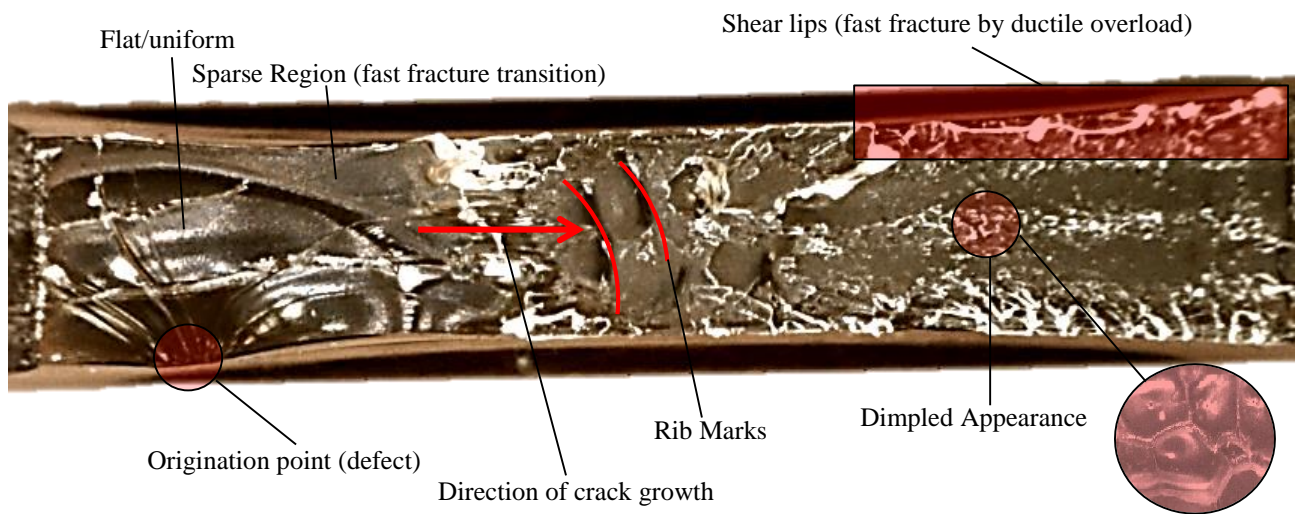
Macro-scale fracture surface of the Ultem 1000 samples after uniaxial tension.
